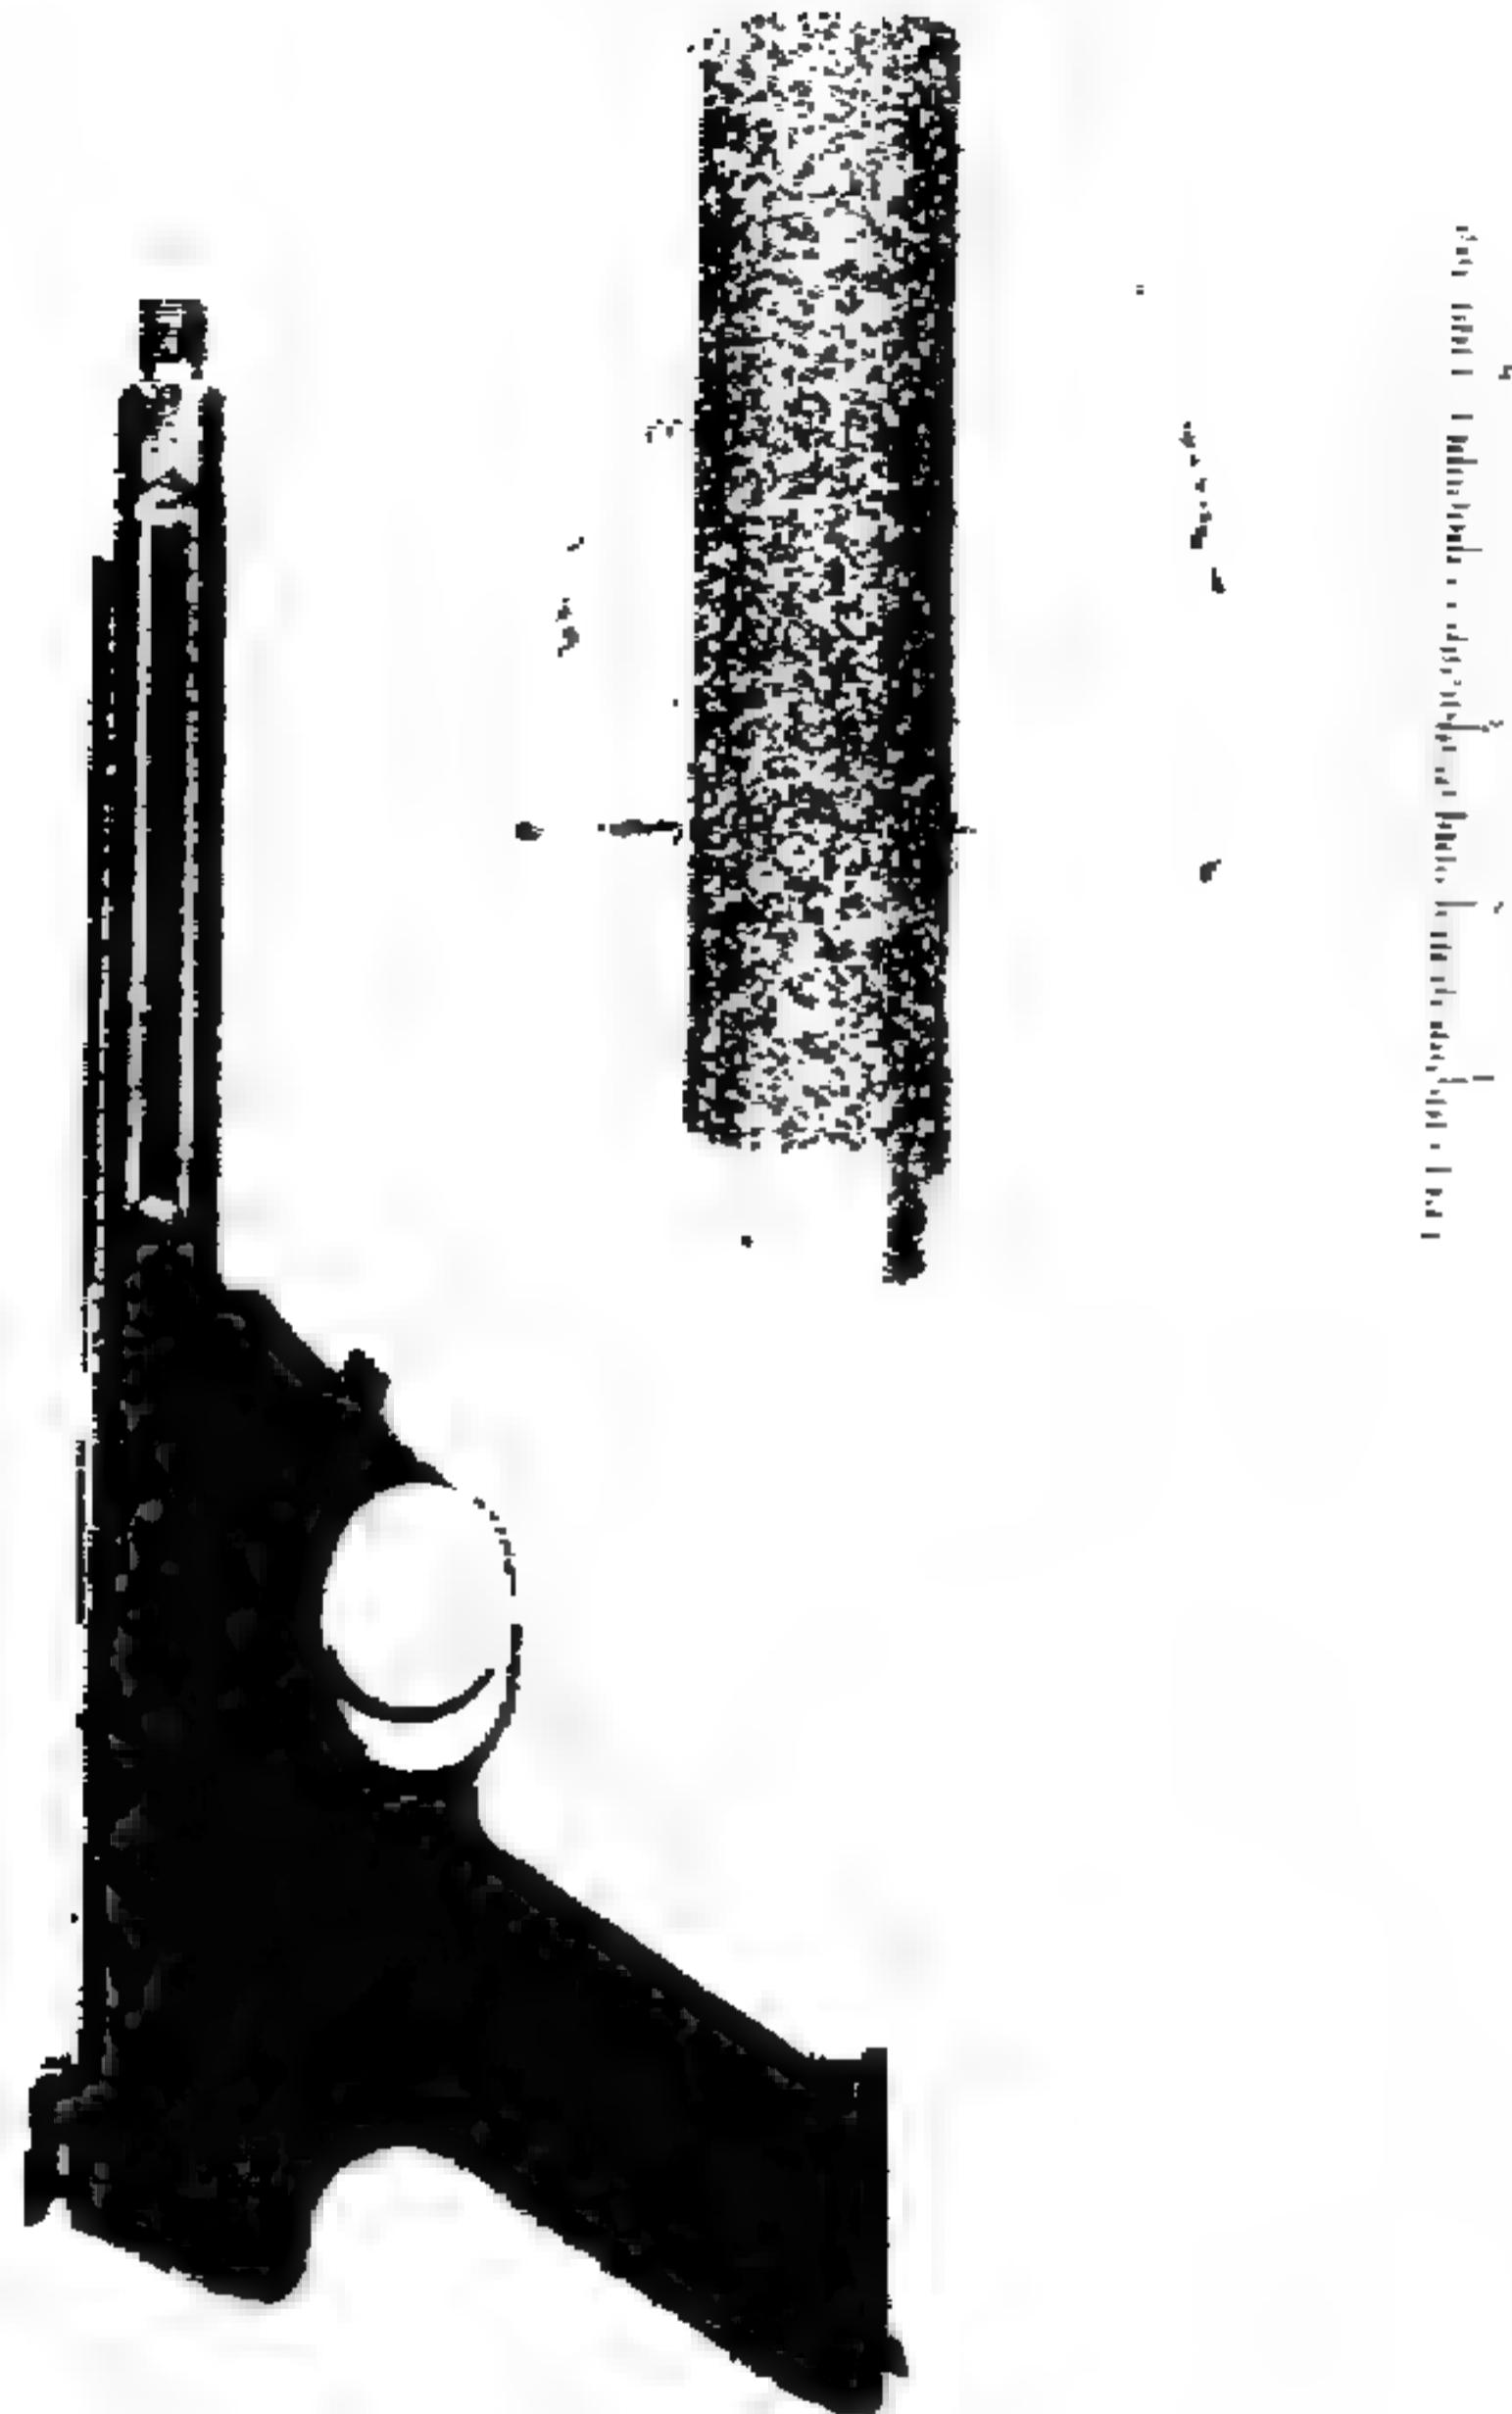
Caliber .22 Hi-standard Pistol and FA Silencer (with Tape Removed), Disassembled
